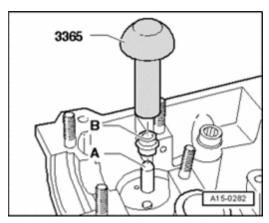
Identifying Plastic Sleeve, Valve Stem Oil Seal & Valve Stem Seal Driver 3365 Courtesy of VOLKSWAGEN UNITED STATES, INC.
